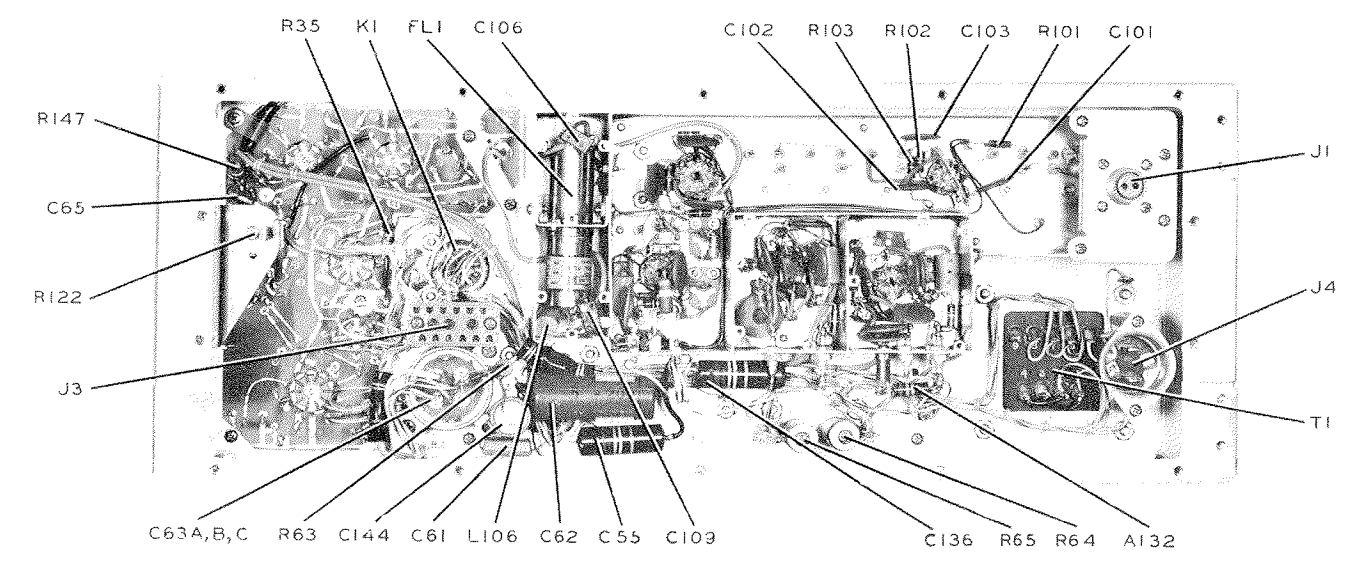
51N-7 Radio Receiver, Bottom View, Covers Removed
